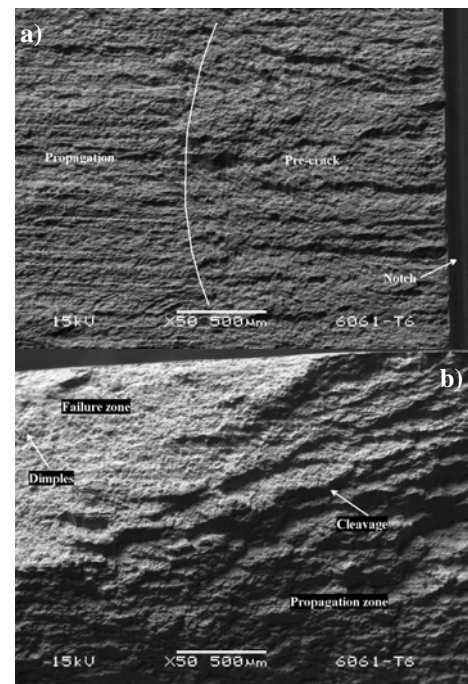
Details of base metal fracture, a) pre-crack and propagation and b) propagation and failure.
